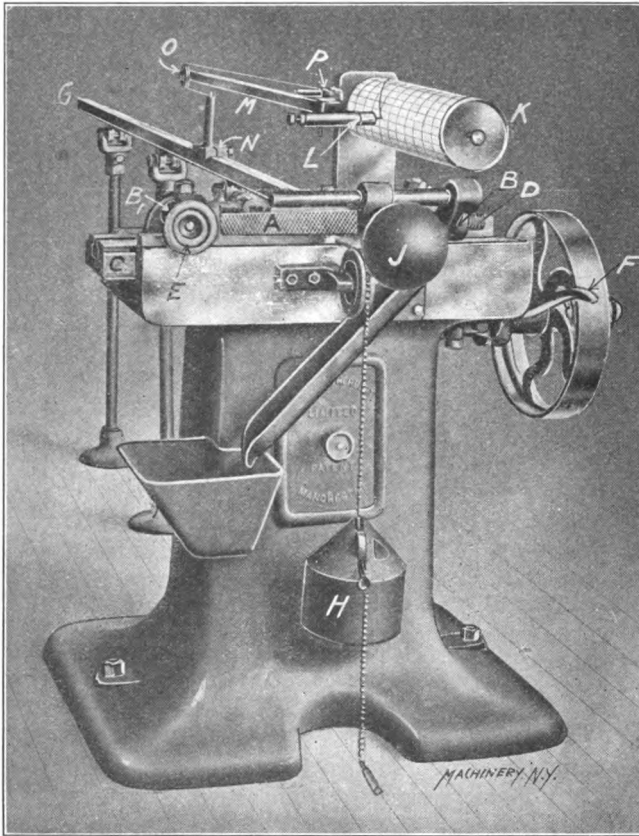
File-testing Machine, Built by Edward G. Herbert, Ltd.
